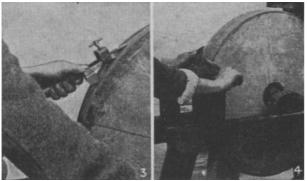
Method of placing hands to control a chisel blade and obtain desired cutting angle. Grinding back of a gouge. Fig. 3. Use of simple tool grinding rest. Fig. 4. Grinding a bill-hook, which is held obliquely across the stone.
